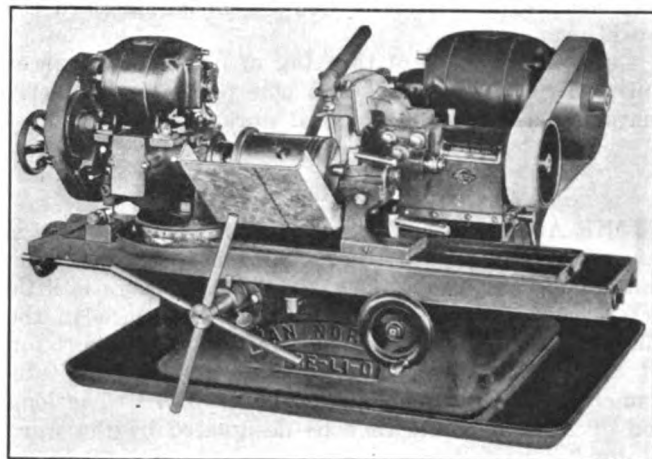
RE-LI-O NO. 2 WET GRINDING MACHINE
